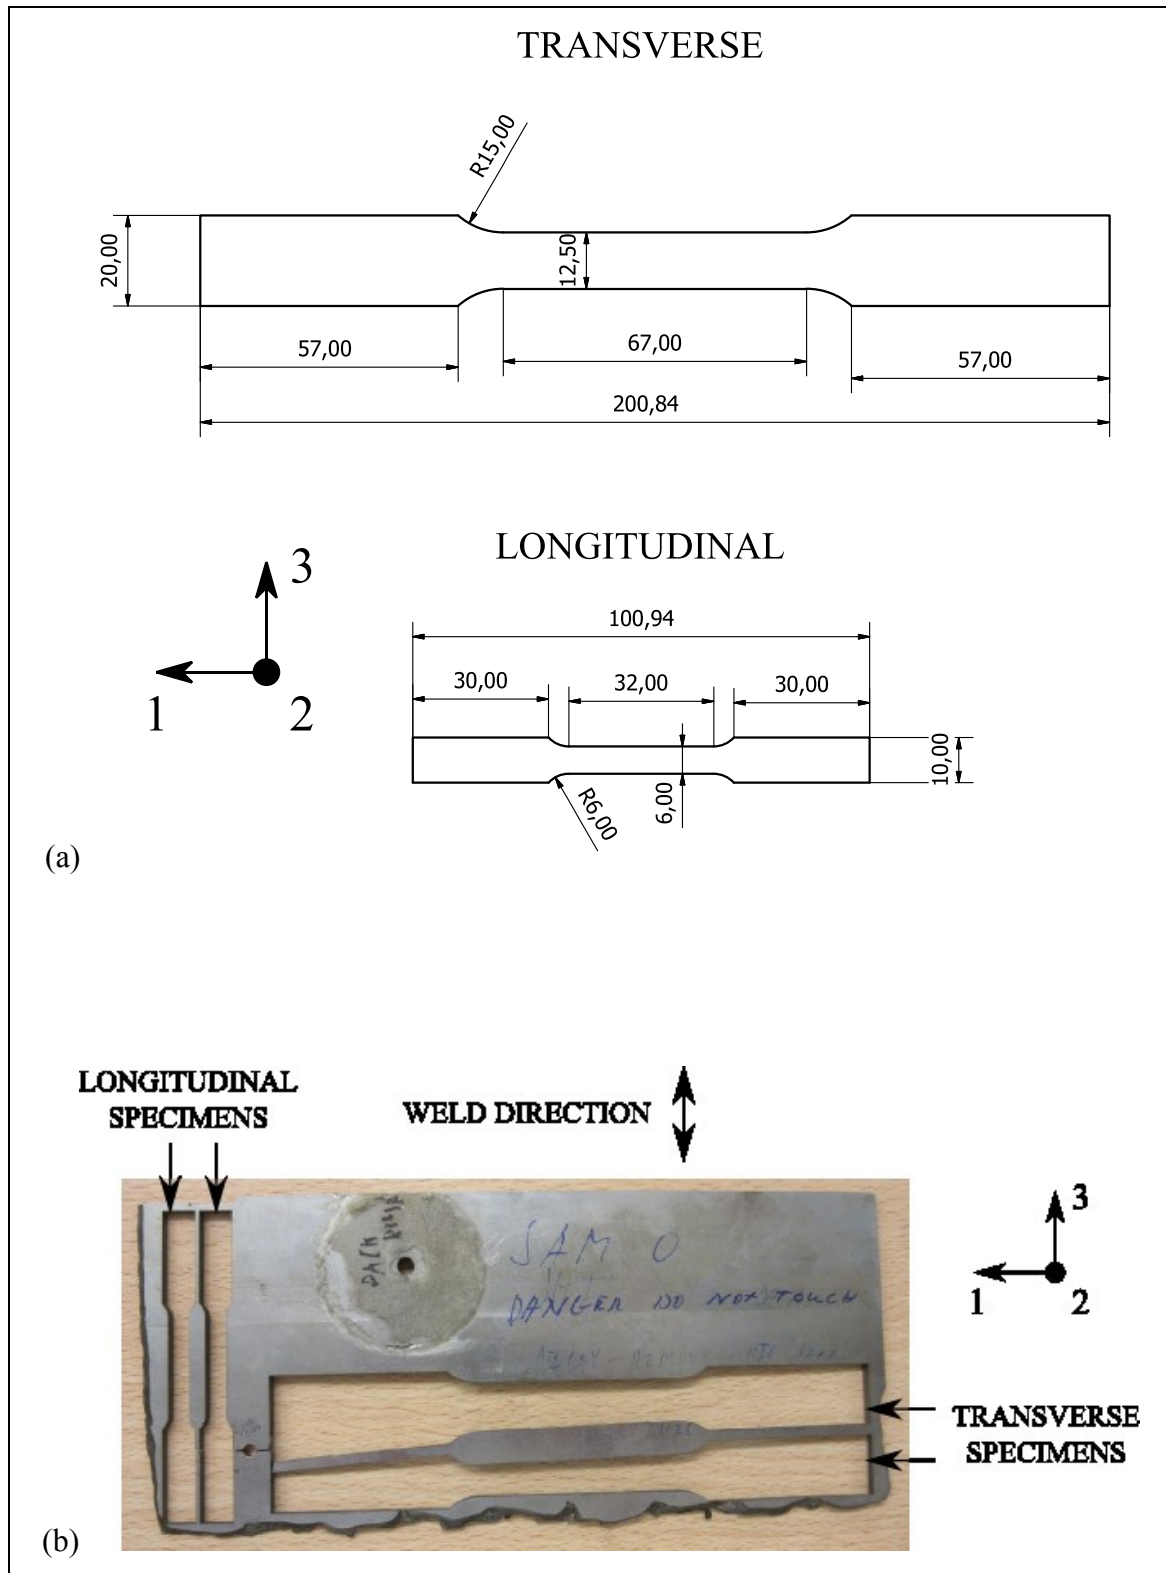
Geometry of the transverse and longitudinal tensile specimens (a), and a picture of the cladding after it was removed from the as-welded plate and tensile specimens were extracted (b). Dimensions are in millimetres.
